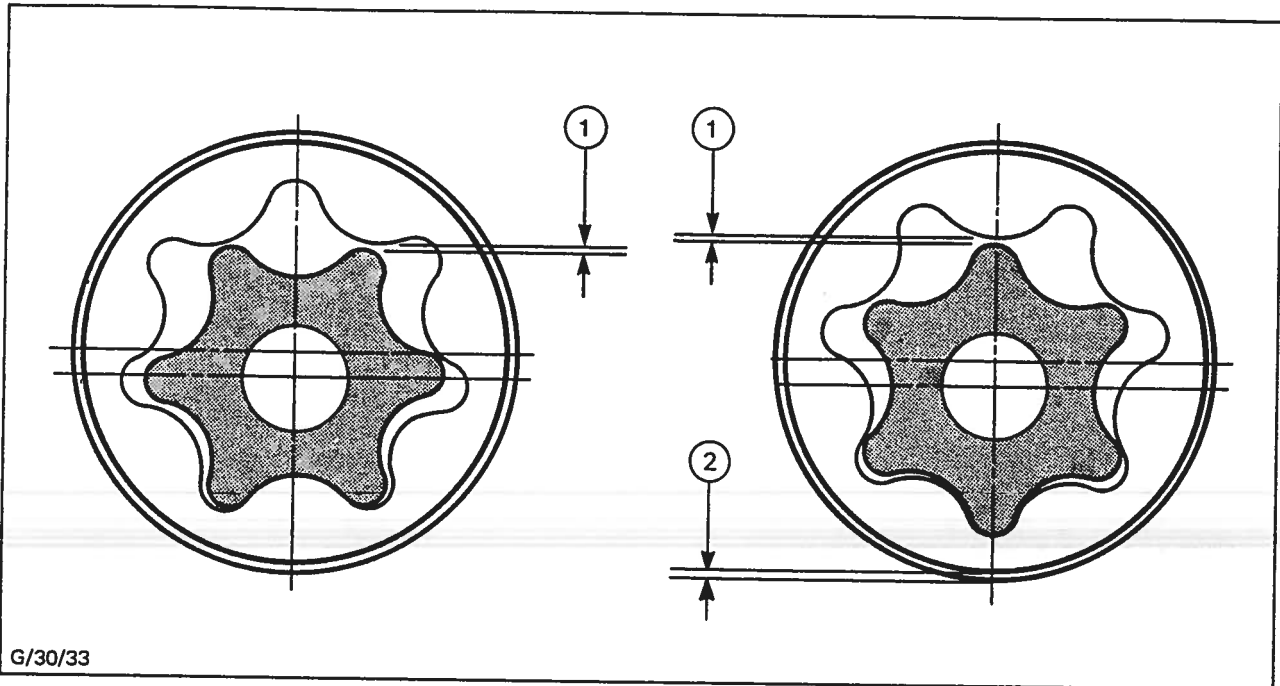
Measuring Rotor Clearance - 2722, 2723, 2725 and 2726T Engines Fitted with High Inclination Oil Pans
